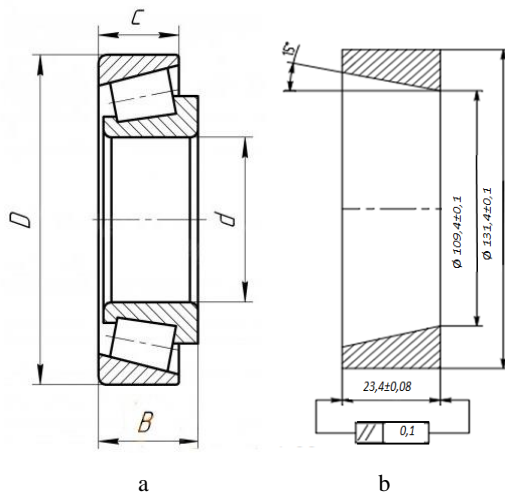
The design scheme: a – bearing 32017X; b – layout of the ring
